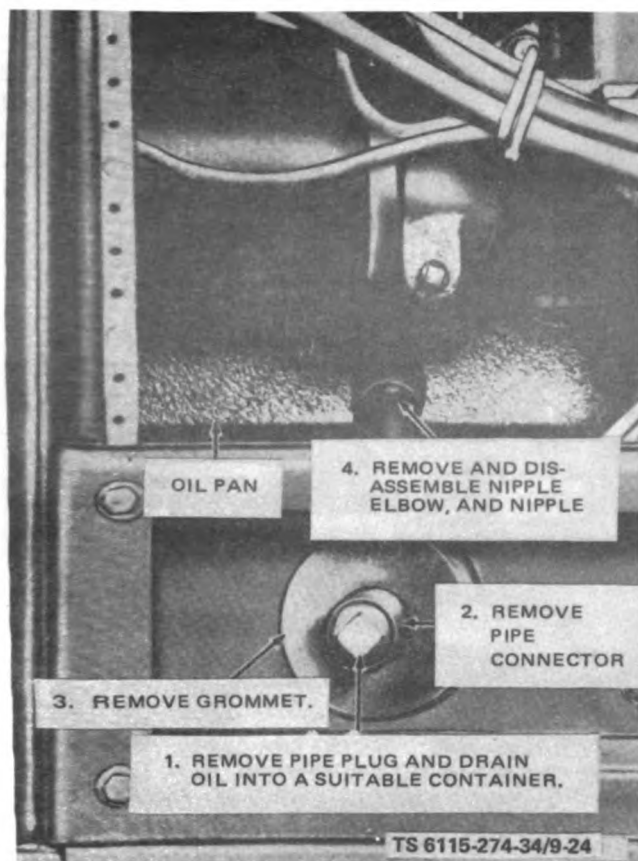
Oil Pan Drainpipe, Removal and Installation
